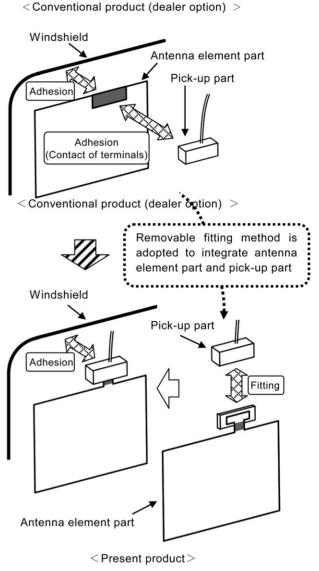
Attachment Configuration of Antenna Element Part and Pick-up Part
